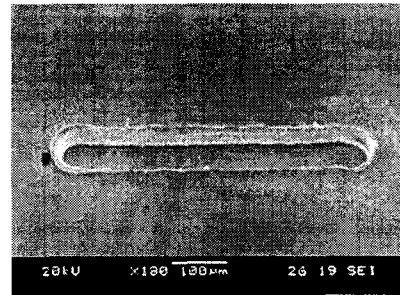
Groove with burr removal by electrical discharge machining inside the groove after machining
